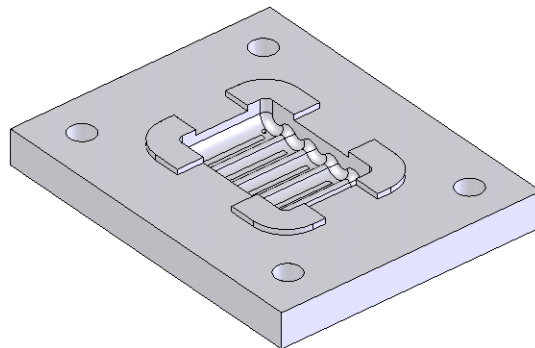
Cavity of the mold for manufacturing this soap case.
